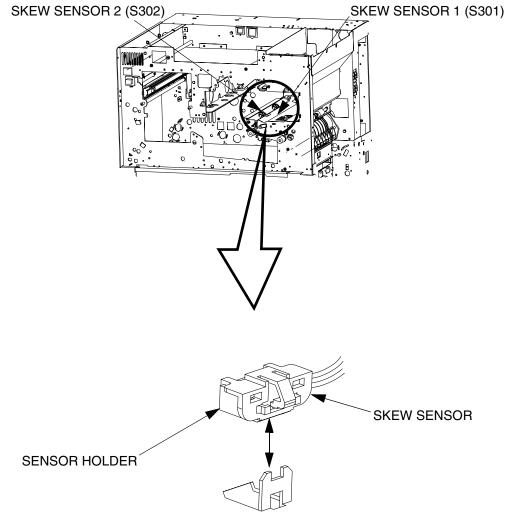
Removal of the Skew Sensor 1 and 2(S301 / S302)
